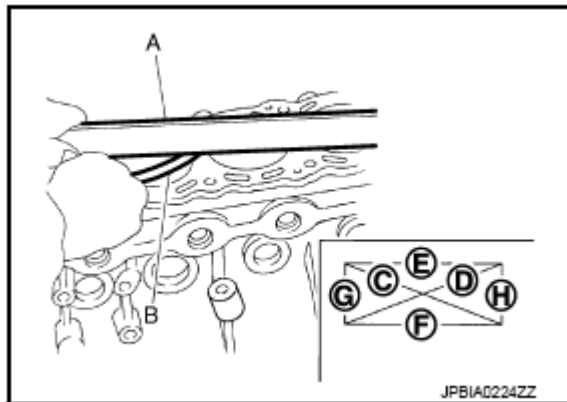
Checking Cylinder Block Distortion Using Straightedge And Feeler Gauge
